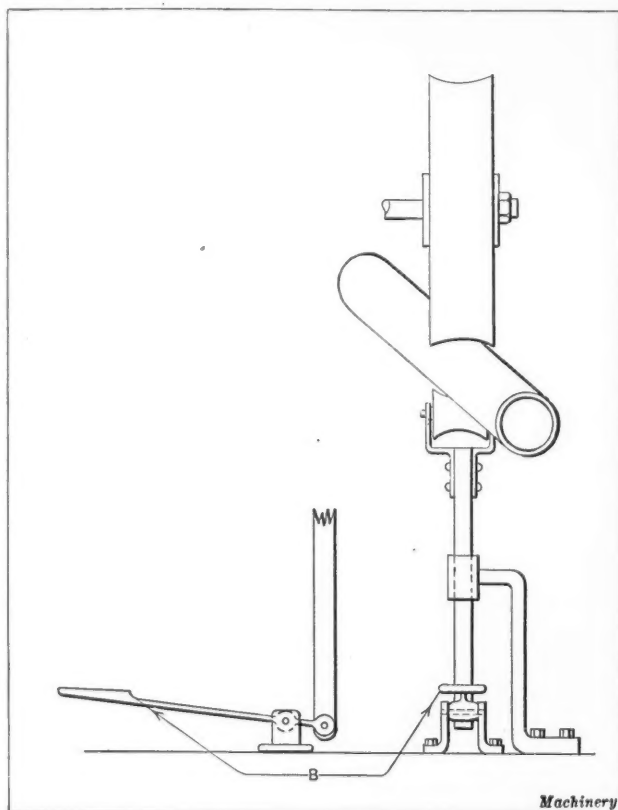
Arrangement by which the Flash is removed from Welded Pipe
